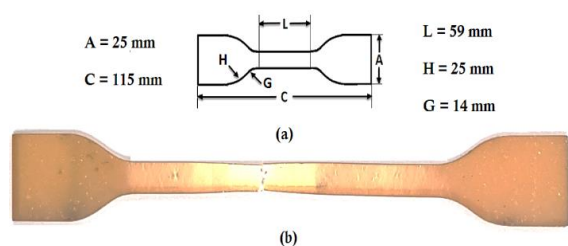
(a) Schematic of tensile specimen and (b) tensile specimen after tensile test
